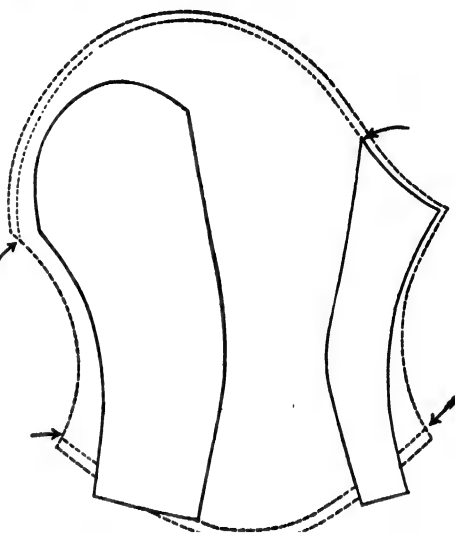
Method of cutting Bishop or Puffed Sleeves.
